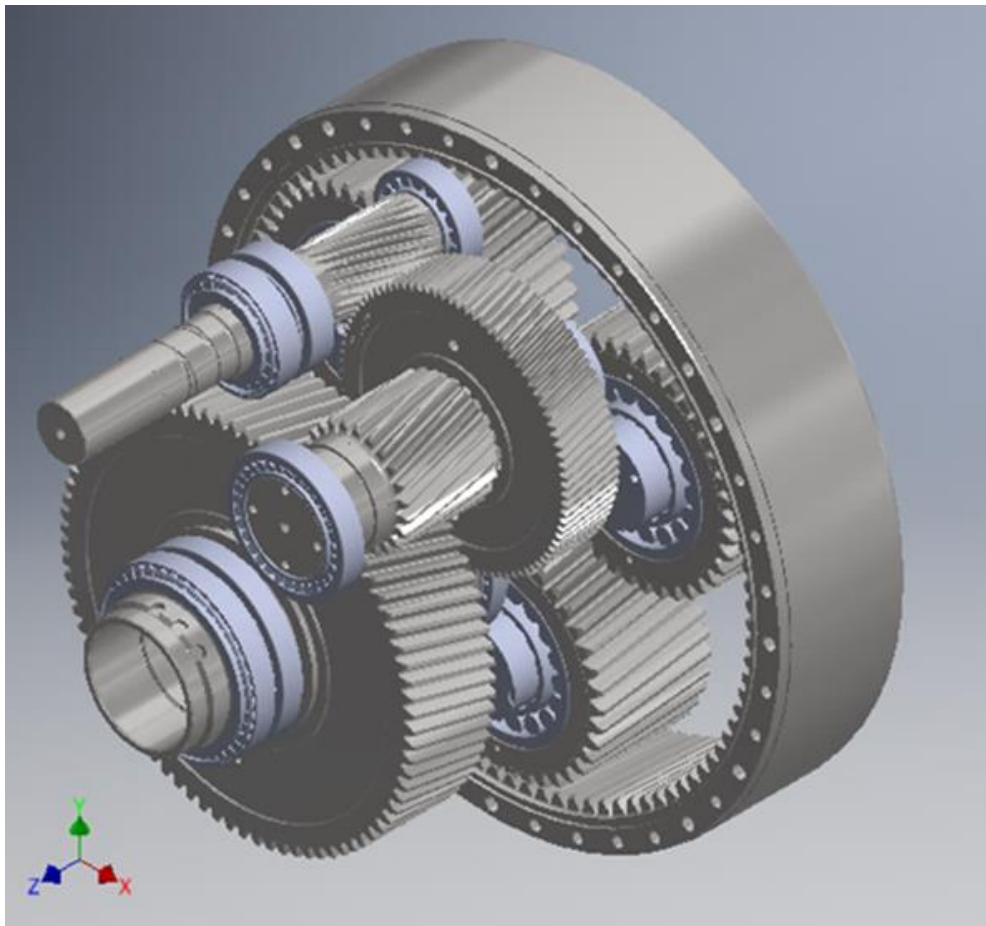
CAD model for NREL multistage gearbox of 750kW WT (Drivetrain-D) consisting of a fixed ring planetary gear set with three planets and two parallel gear sets with two intermediate shafts and overall gearbox ratio of 1:81.49
